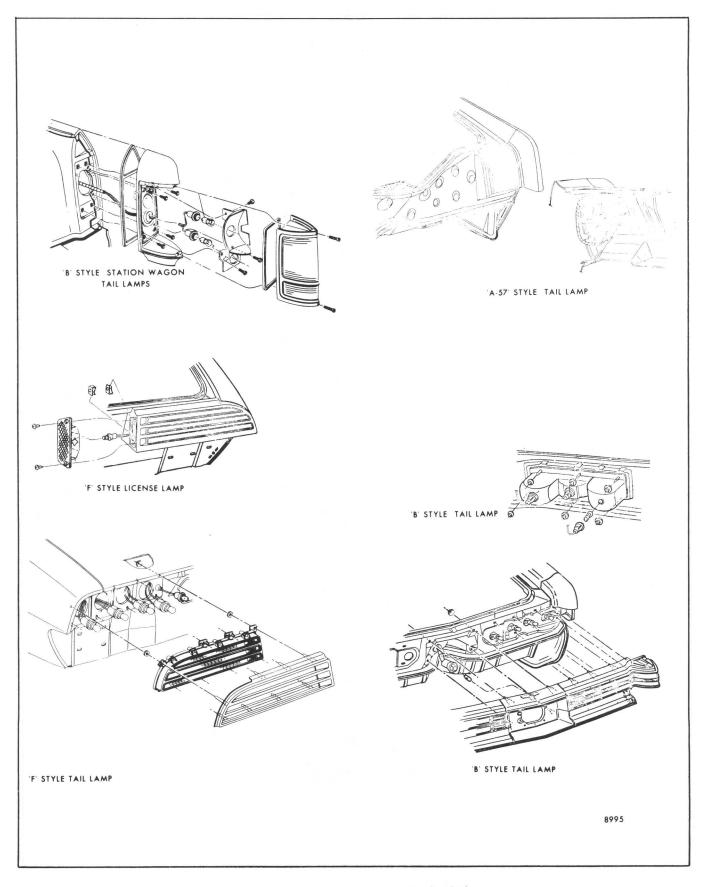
Exterior Lamp Installation - Pontiac Styles
